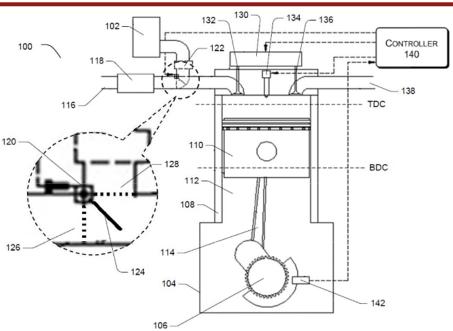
illustrates a four stroke internal combustion (IC) engine equipped with a collection chamber.
